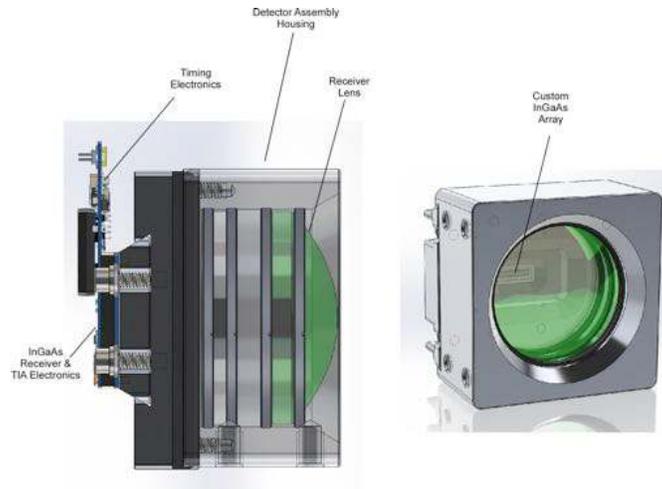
Solid model of the detector housing assembly. This unit is designed to be light tight to prevent unwanted returns.
